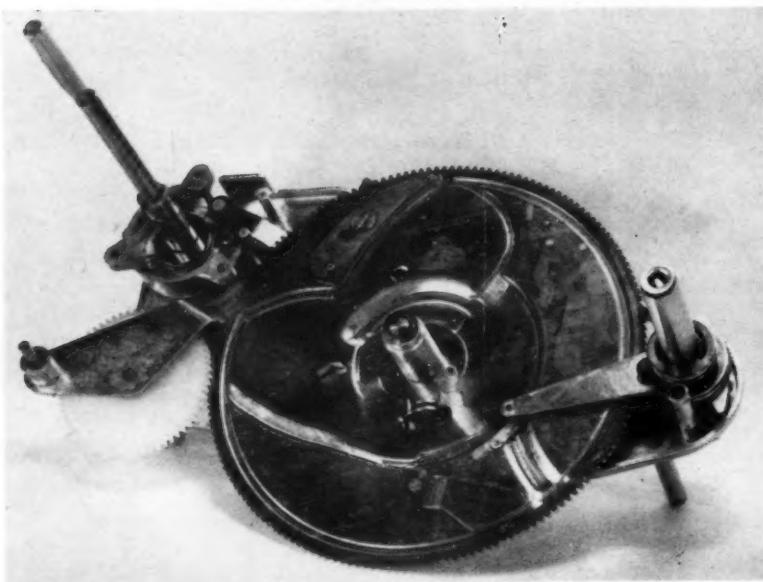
The complete sub-plate assembly, showing the cam gear and turntable spigot housing in their relative positions
